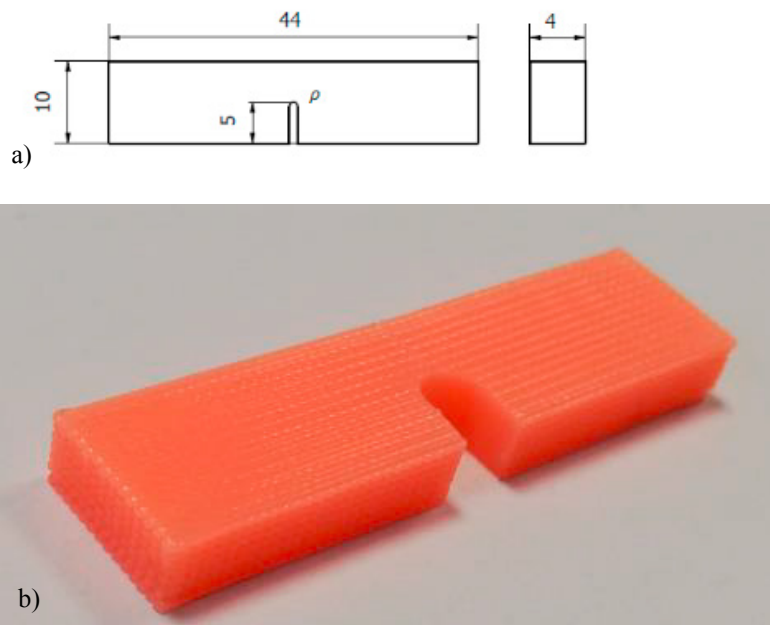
PLA SENB specimens containing U-notches. a) Schematic of a generic specimen; b) image of a particular specimen, with notch radius ( $\rho$ ) = 2.0 mm, and raster orientation 0/90.
